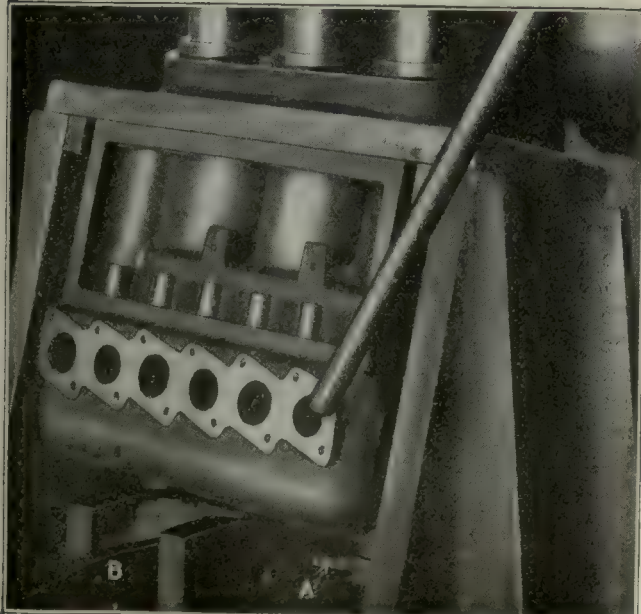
BORING FOR CONNECTING-ROD CLEARANCE
